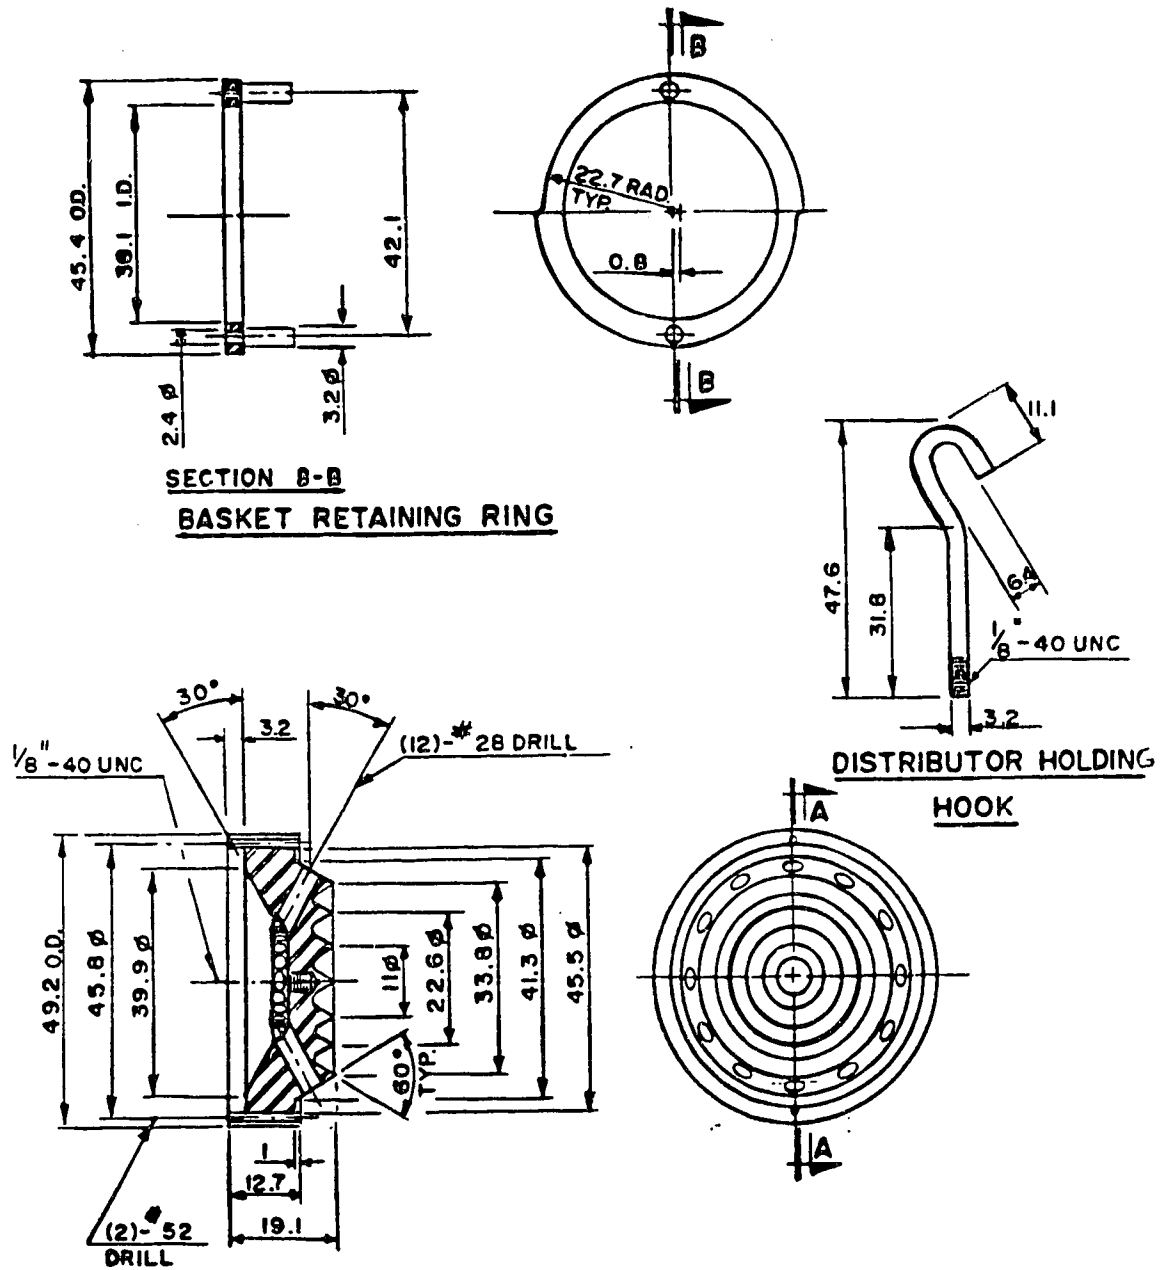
Condensate distributor. Linear dimensions have units of millimeters.
